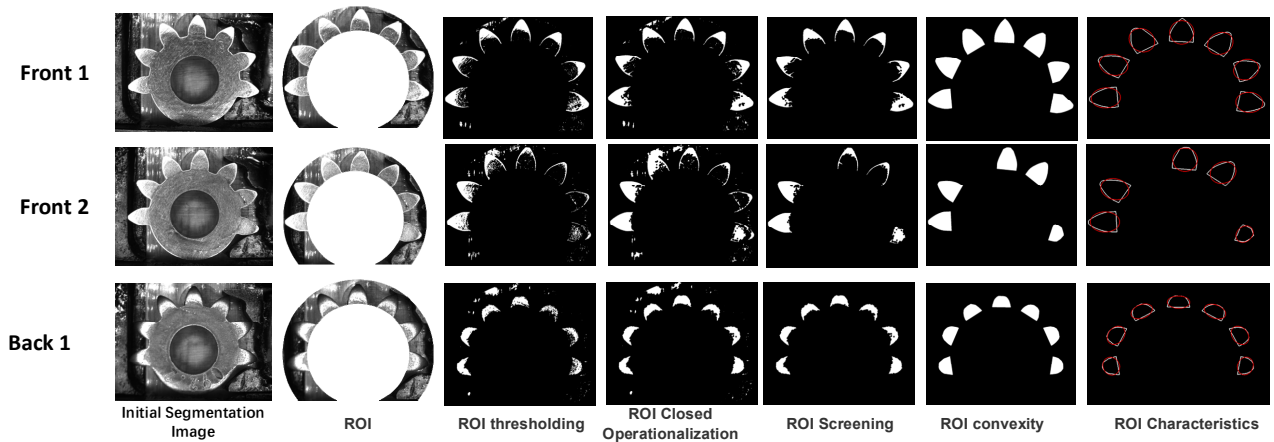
Comparison of image processing for identification of collapsed angle surfaces of fine blanking pinion gears.
